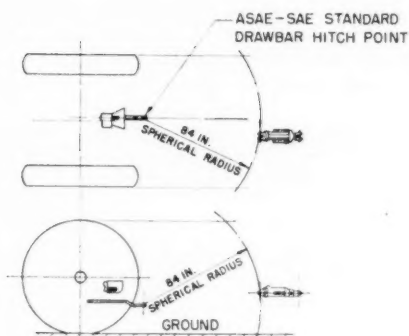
Hose length diagram for wheel-type tractor drawbar — 84-in spherical radius (A.S.A.E.—S.A.E. Standard)
